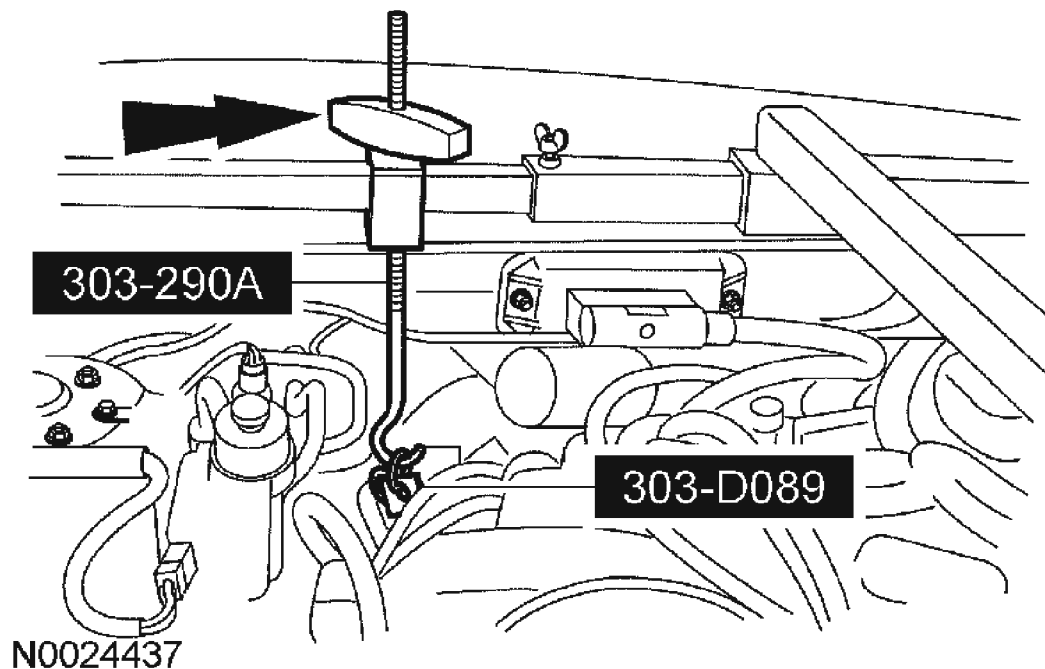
Removing LH Upper Transaxle Mount Bolt
